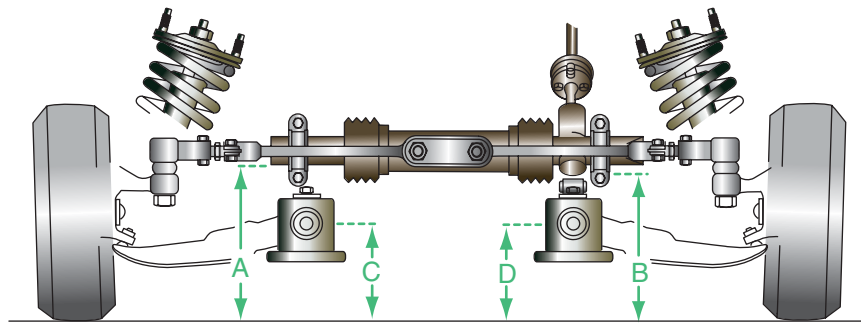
Pull the chassis upward 3 in. (7.6 cm) to check for improper toe change indicating unequal steering linkage height.
